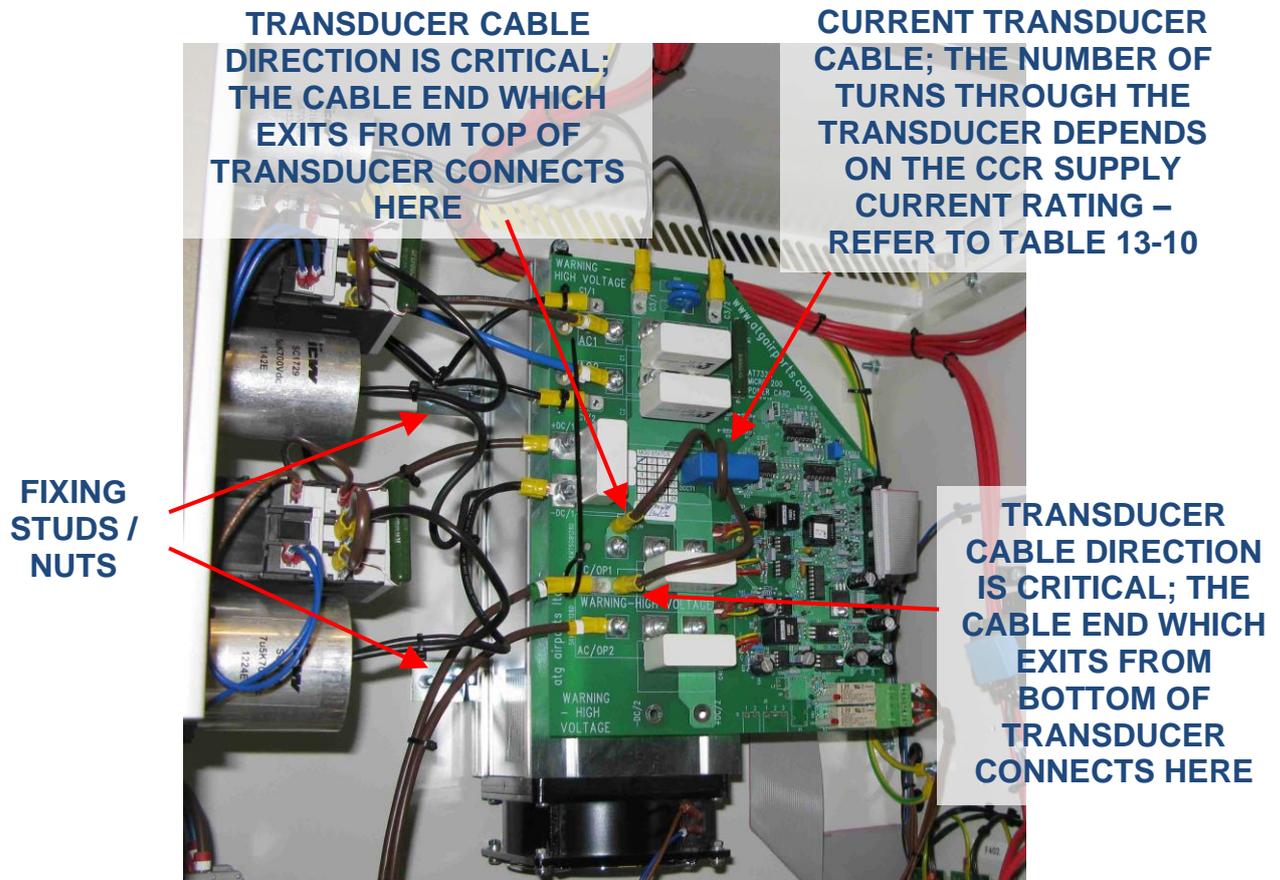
25A IGBT stack assembly - fixings and current transducer cable marked
